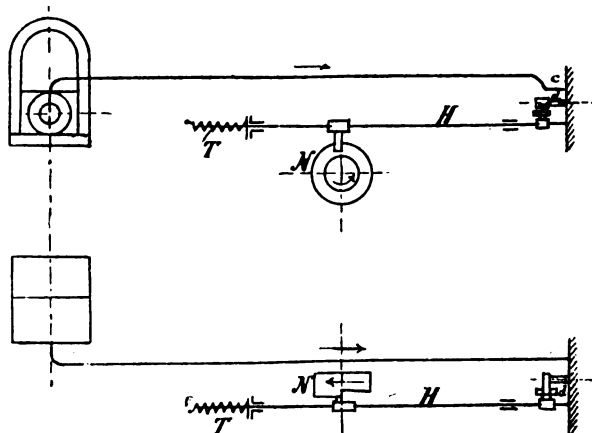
DIAGRAM OF CONNECTIONS—ELEVATION AND PLAN.
